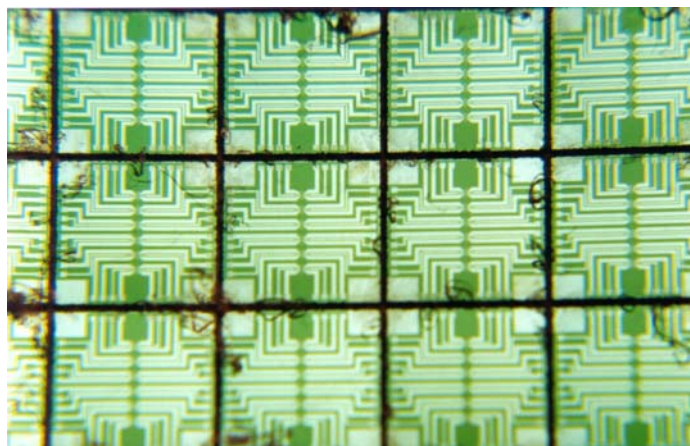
Final manufactured chips cut with a dicing saw.
